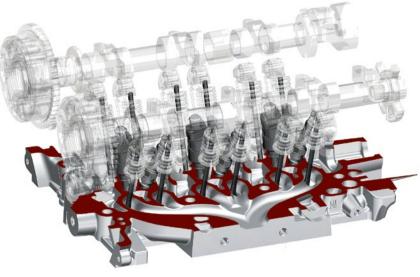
Cylinder head with roller cam follower valve train and integrated exhaust manifold (© Opel)
